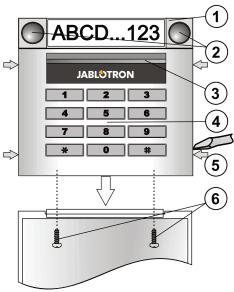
control segment; 2 – segment buttons; 3 – backlit activation button; 4 – access module with RFID card reader; 5 – tabs for module opening; 6 – keypad cover screws
